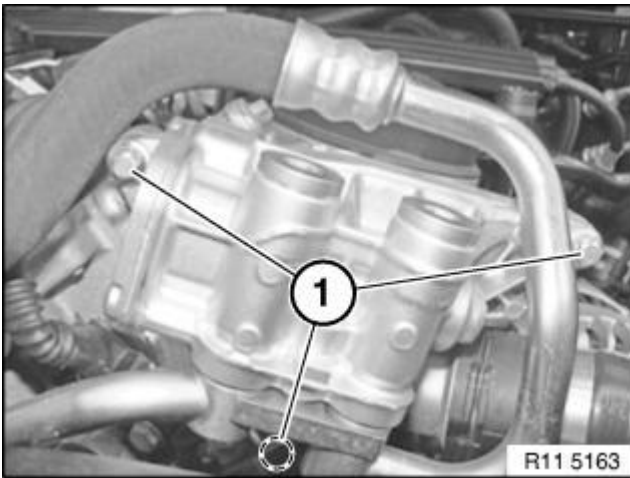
Identifying Bolts On Oil-Coolant Heat Exchanger
